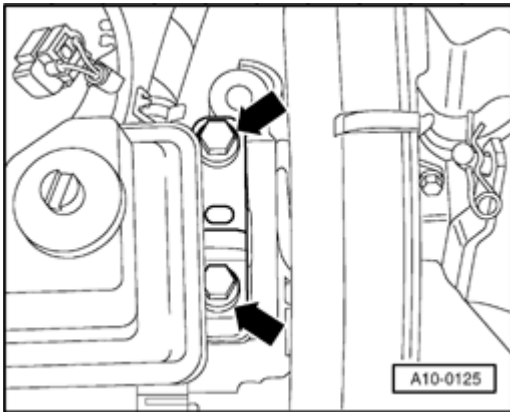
Locating Engine Carrier Bolts (Engine Side)
